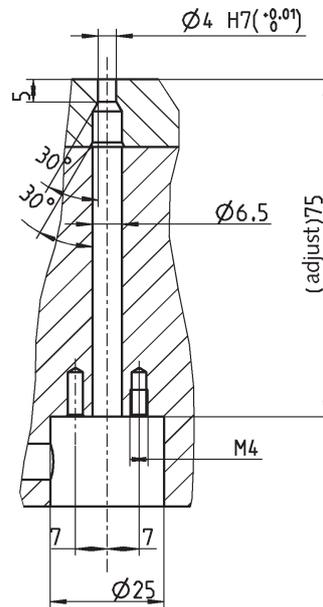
Bore dimension for Type 6155AE with extension sleeve and holding plate
